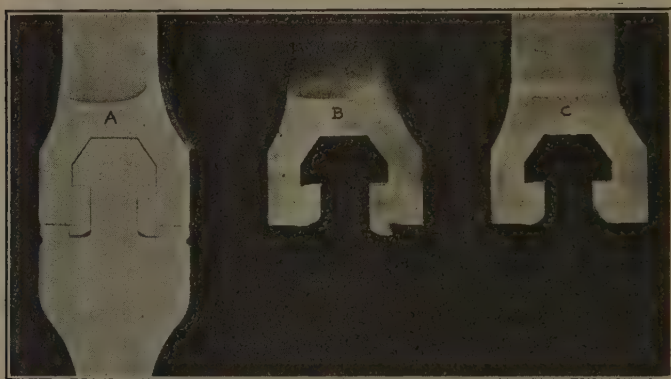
BROKEN TURBINE-BUCKET DOVETAILS. 17TH STAGE OF 30,000-KW. 1800-R.P.M. 17-STAGE TURBINE
